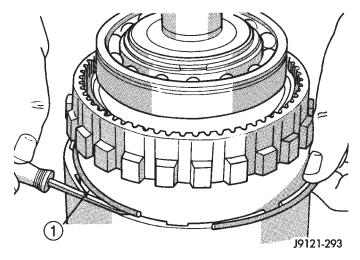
Clutch Drum Outer Retaining Ring Removal 1 – OUTER RETAINING RING
